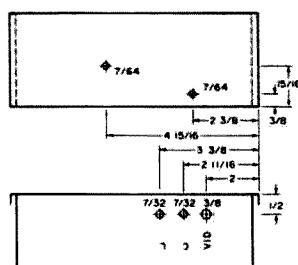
TX-432 chassis drill guide. All dimensions in inches. All measurements from outside edge of chassis. Chassis is LMB #850. Guide not drawn to scale.
